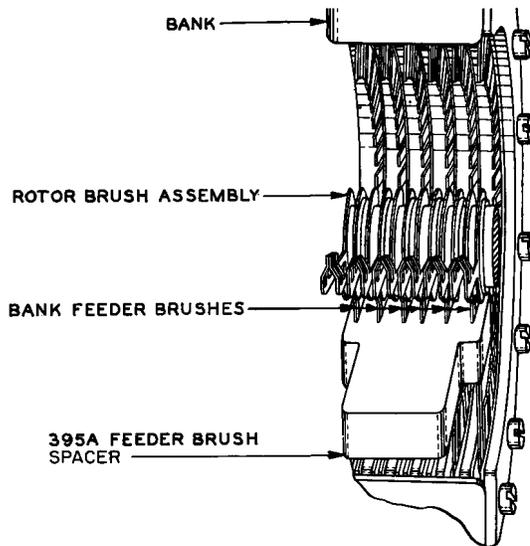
Method of Using 395A Feeder Brush Spacer
